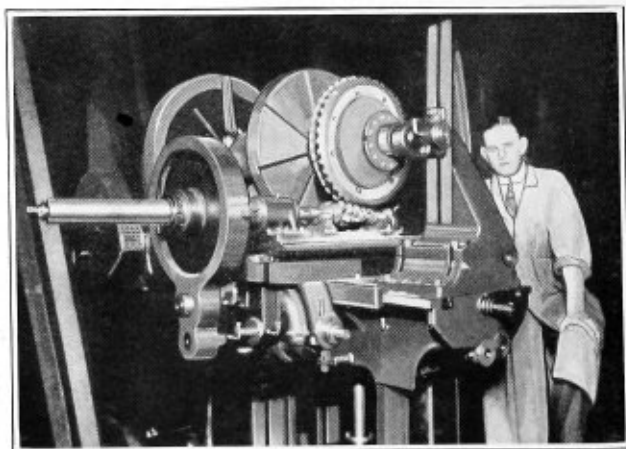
MACHINE USED FOR CUTTING WORM-WHEELS USING TAPERED HOBS
